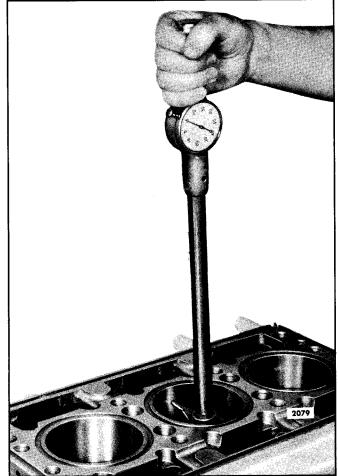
Checking Bore of Cylinder Liner using Tool J 5347-B
